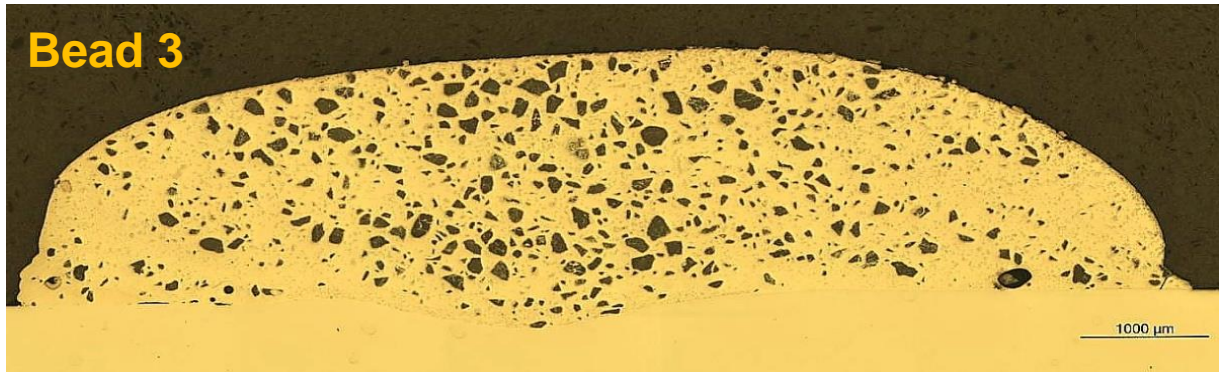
Forehand welded bead macrograph. FTC is spread on the top. Etched with Murakami.
